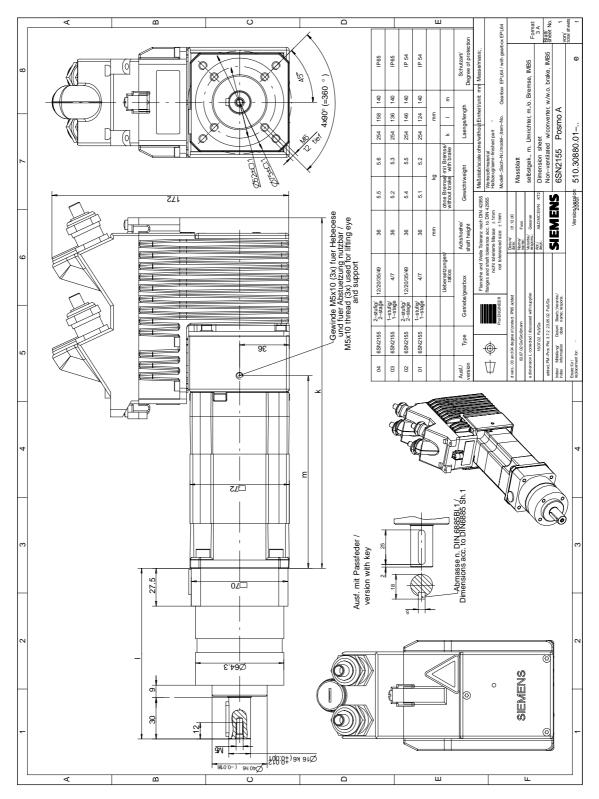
Dimension drawing: SIMODRIVE POSMO A – 300 W with planetary gearbox (1-stage, 2-stage)
